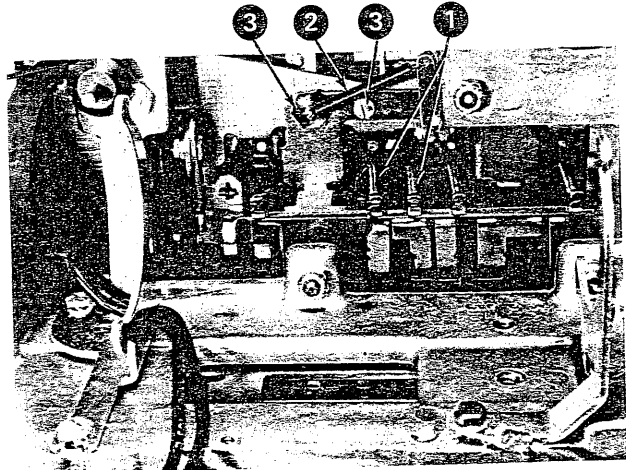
Rotate-Selection-Differential Removal (Steps 9-11)
